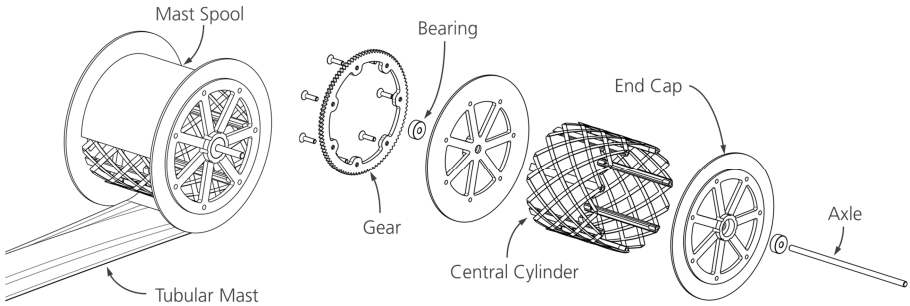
Mast Spool in assembled state with coiled tubular boom (left) and in exploded state detailing its subcomponents (right).
